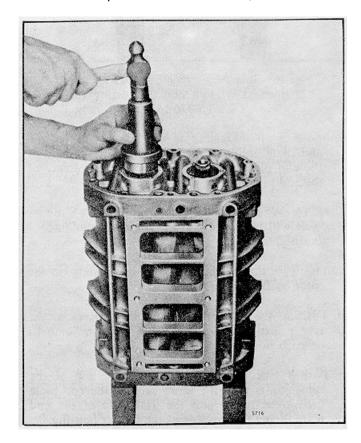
Installing Ball Bearings on Rotor Shaft and in Rear End Plate using Tool J 6270-13
